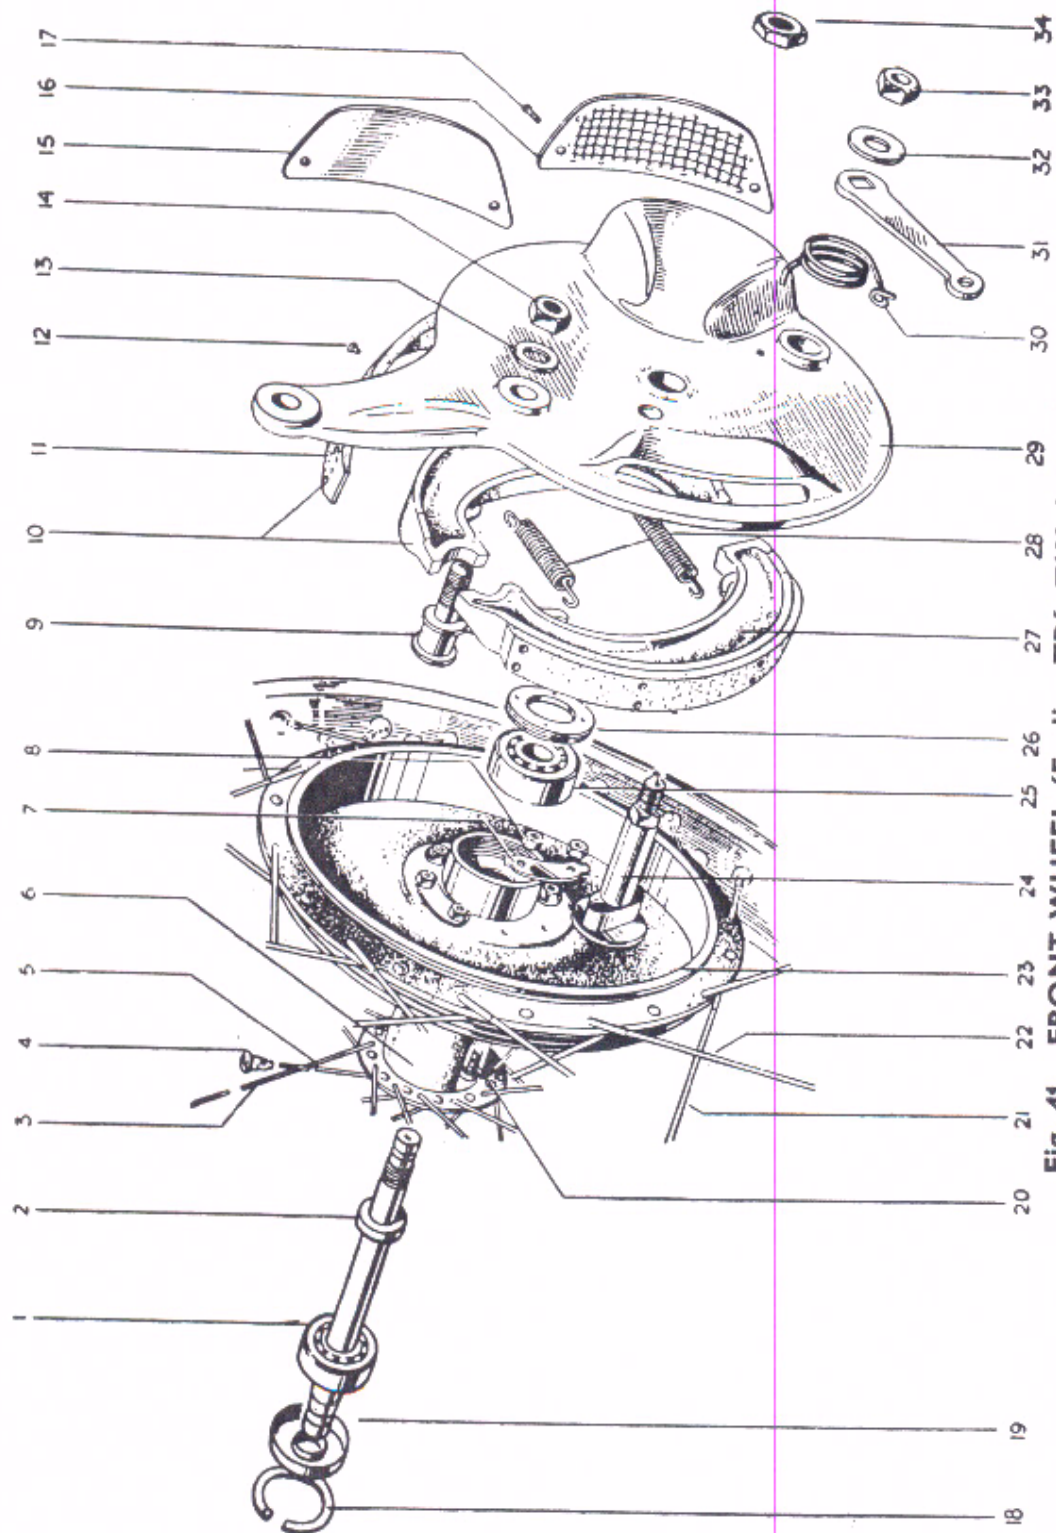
FRONT WHEEL (Earlier TR6, T100 & T110).
